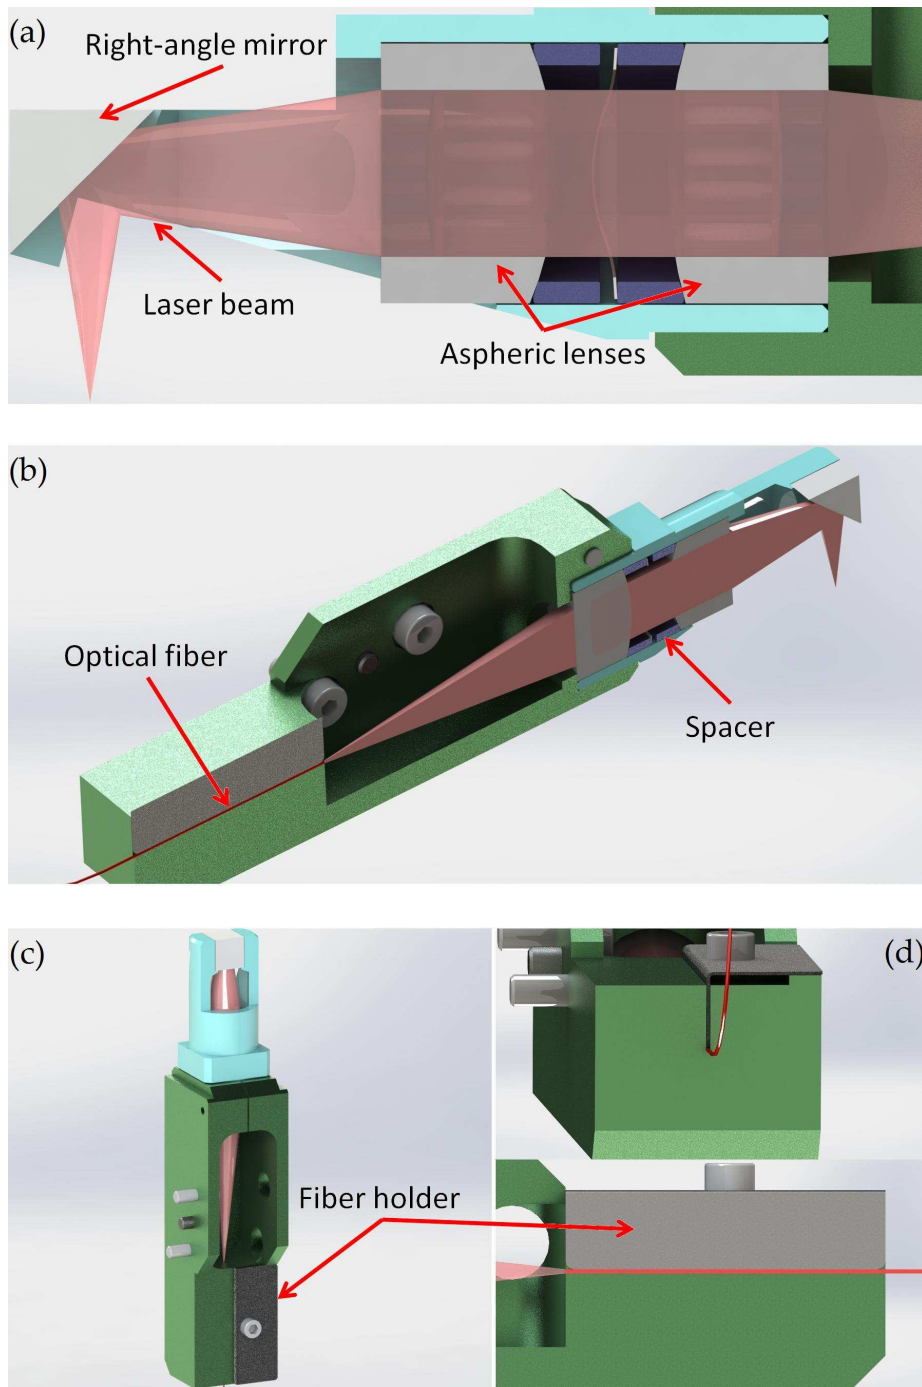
Optical assembly designed for the HSX-AFM: (a) cross section of the lenses holding assembly, together with the right-angle mirror; (b) section view of the whole piece; (c) complete piece; (d) details of the fiber holder.
